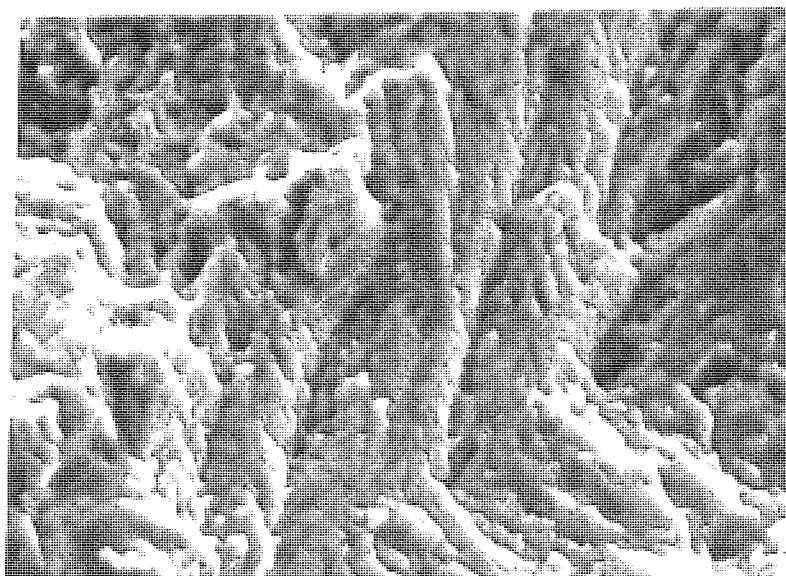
Fracture Surface in the Weld Metal. Tested at Room Temperature in the As-Welded Condition.
